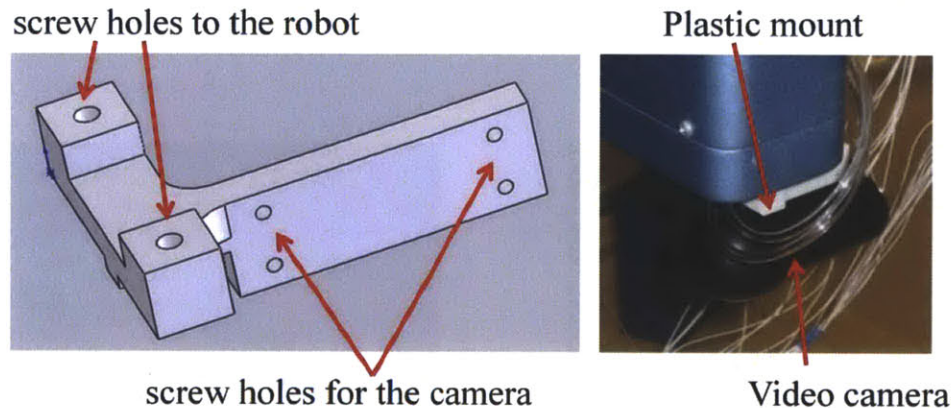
Camera mount for coupling the video camera to the R19 robot. Left: CAD drawing of the mount. Right: Attachment to R19.
